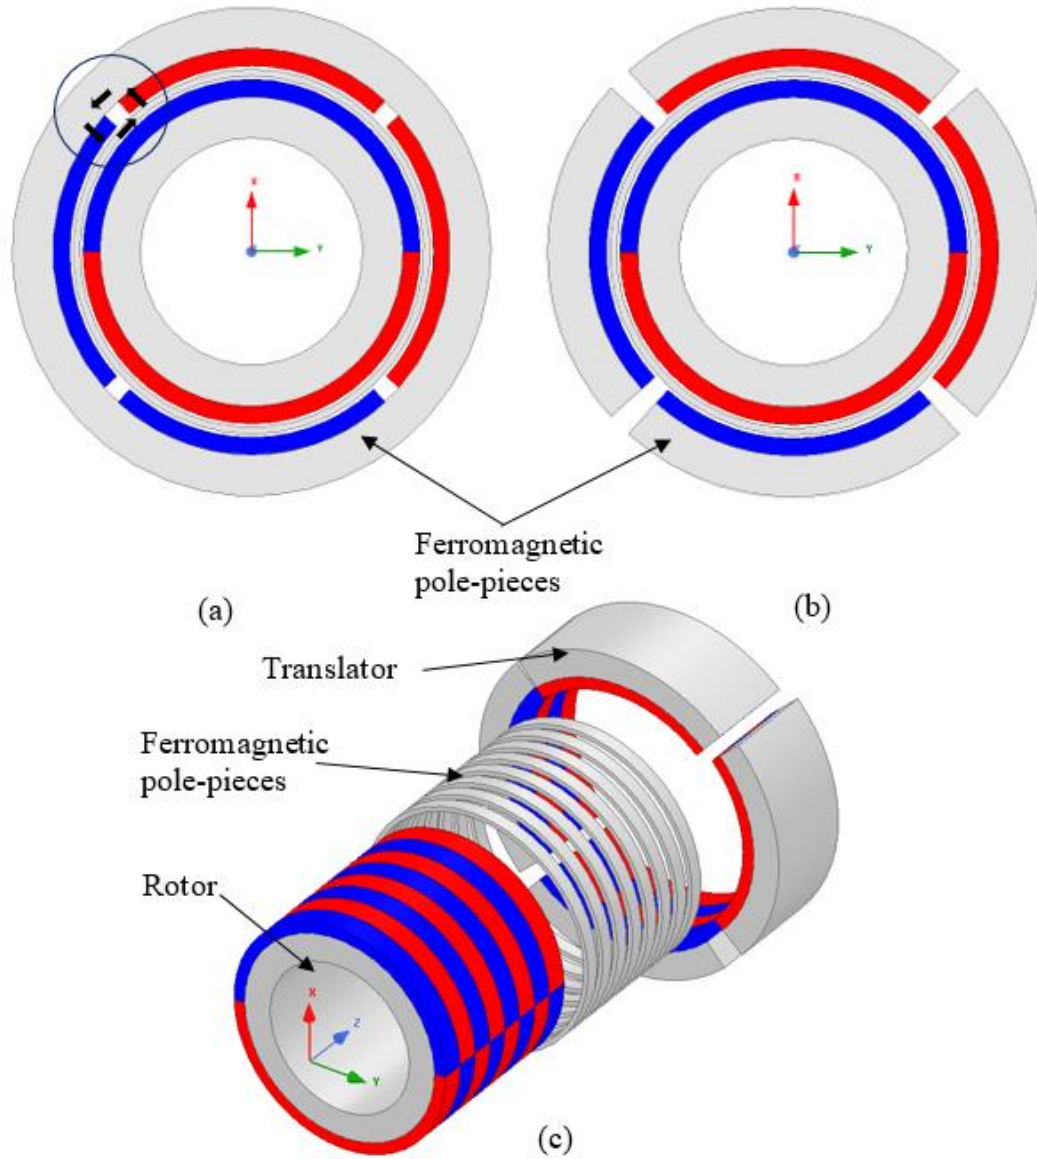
19. Magnetic gears with single ferromagnetic pole-pieces: (a) single core-back and, (b) separated core-back, and (c) isometric break out view of (b).
